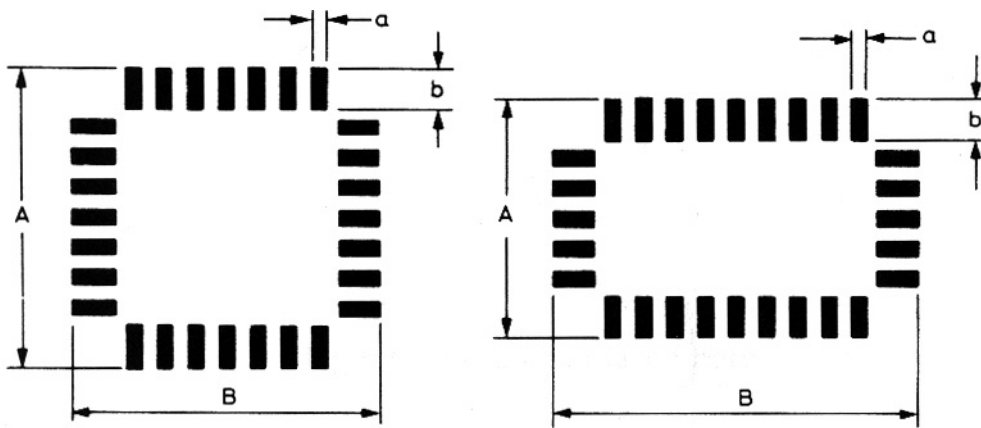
Solder land dimensions for PLCC, LLCC and flatpacks, please refer to Tables 6.4 - 6.7.
